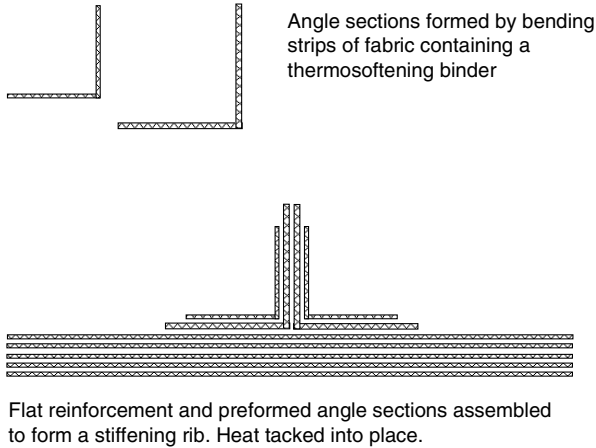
Complex detail may be built into a preform by using thermoformable reinforcements. These incorporate a thermoplastic binder so that they may be heat-set before assembly to form the preform. This is illustrated by a blade stiffener built up from thermoformed tapes.
